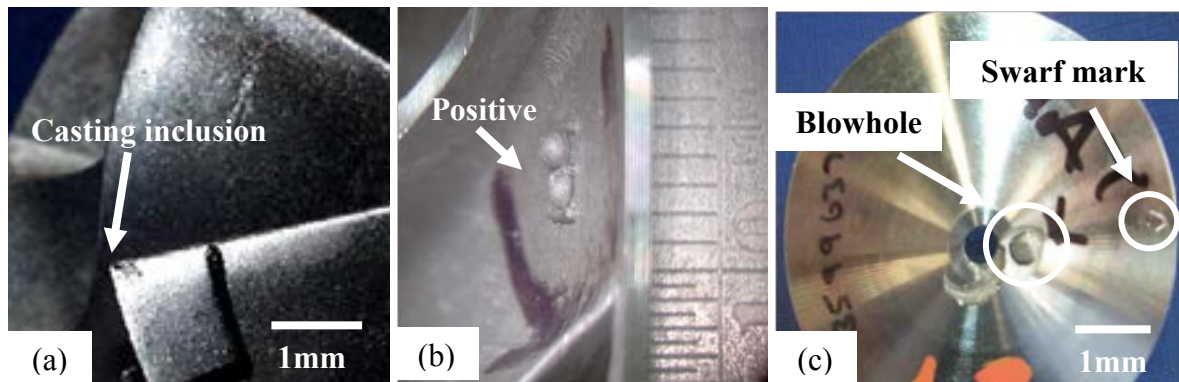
Details of casting and machine defects (a) casting inclusion, (b) positive and (c) blowhole
